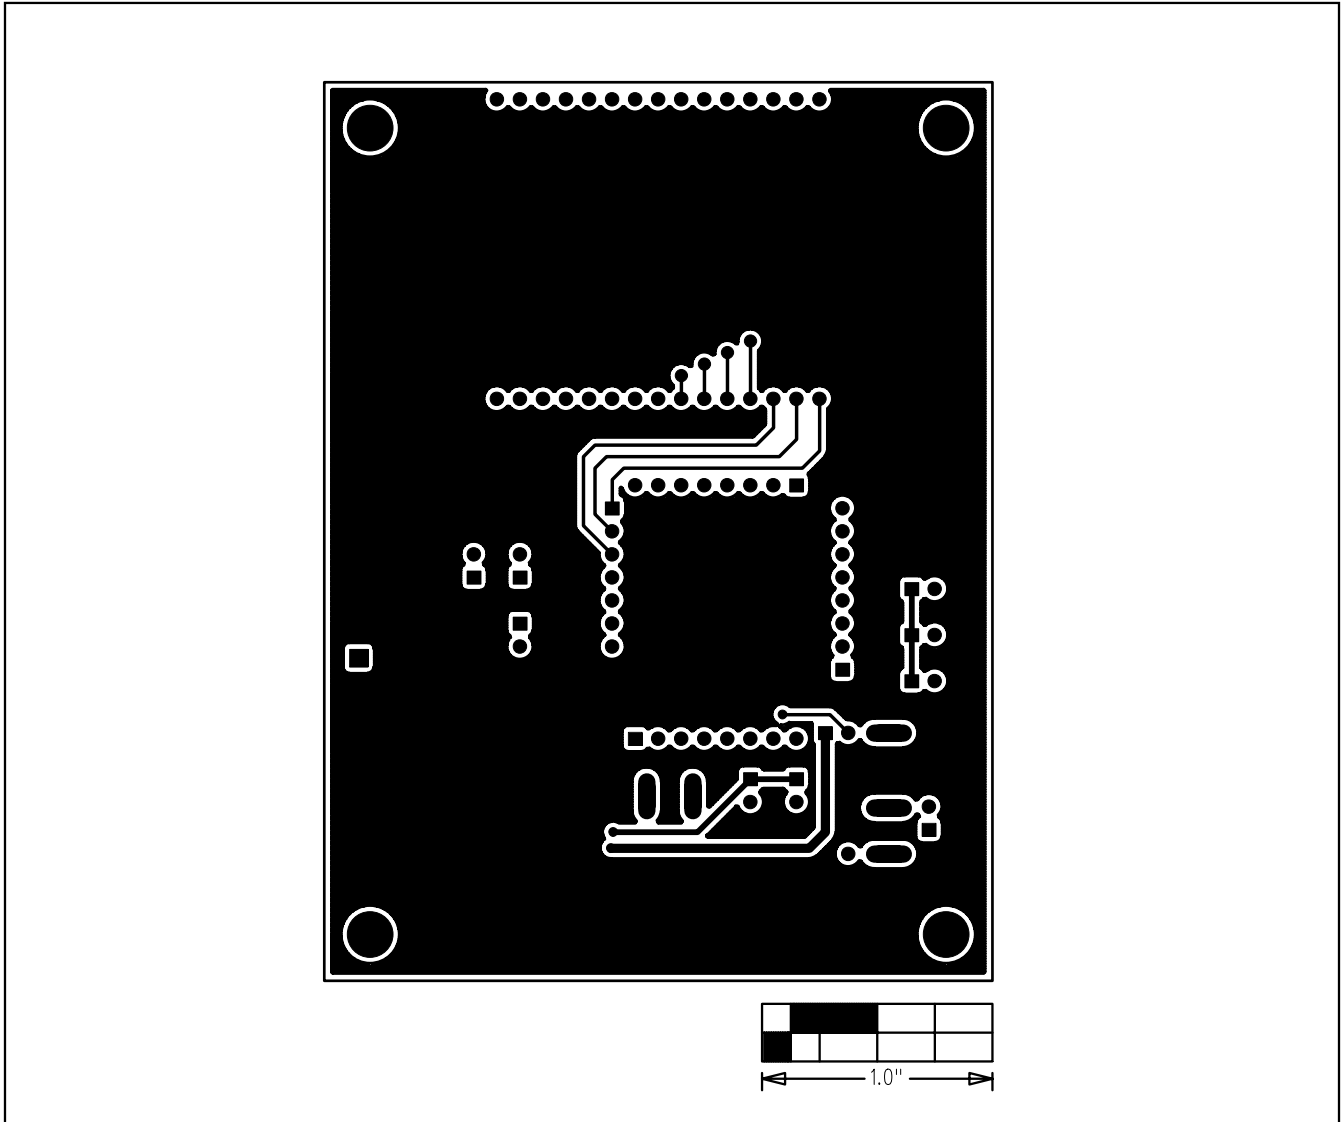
MAX1493 EV Kit PCB Layout—Solder Side
